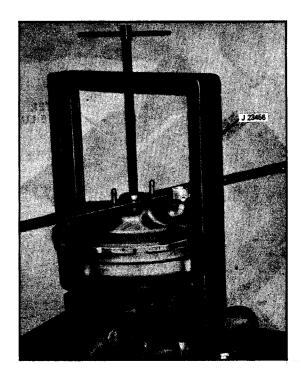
C-8 Tools for Disassembly of Power Brake Housing
